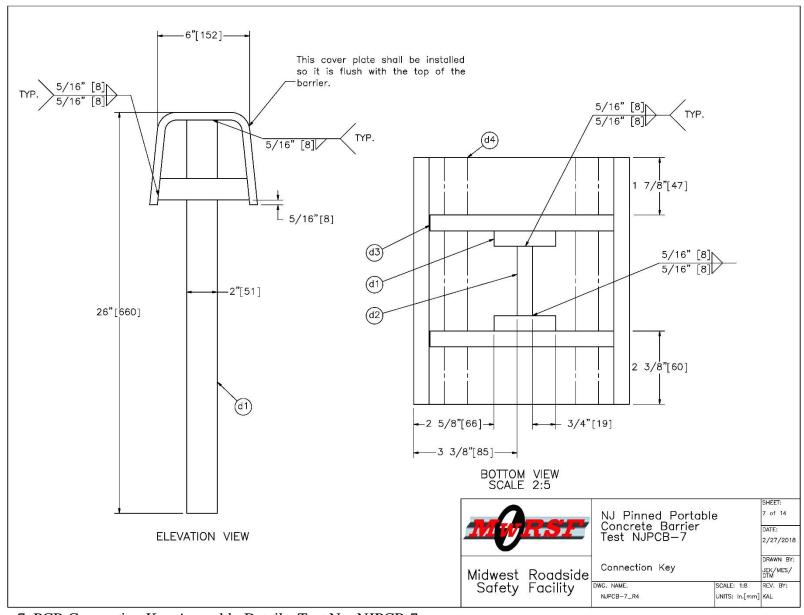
PCB Connection Key Assembly Details, Test No. NJPCB-7
